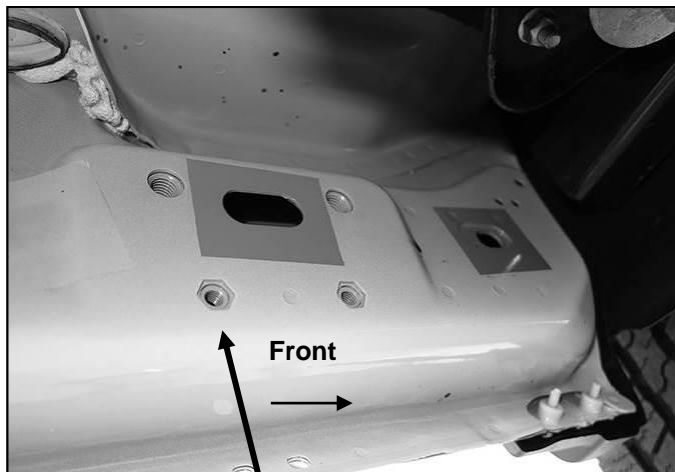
Remove 8mm Hex Bolt. Rotate Bolt Plate to line up with remaining factory hex shaped hole
